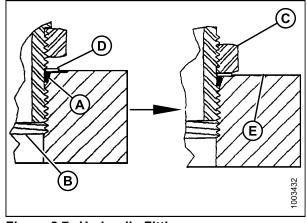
Hydraulic Fitting A - O-Ring B - Fittina E - Part Face
